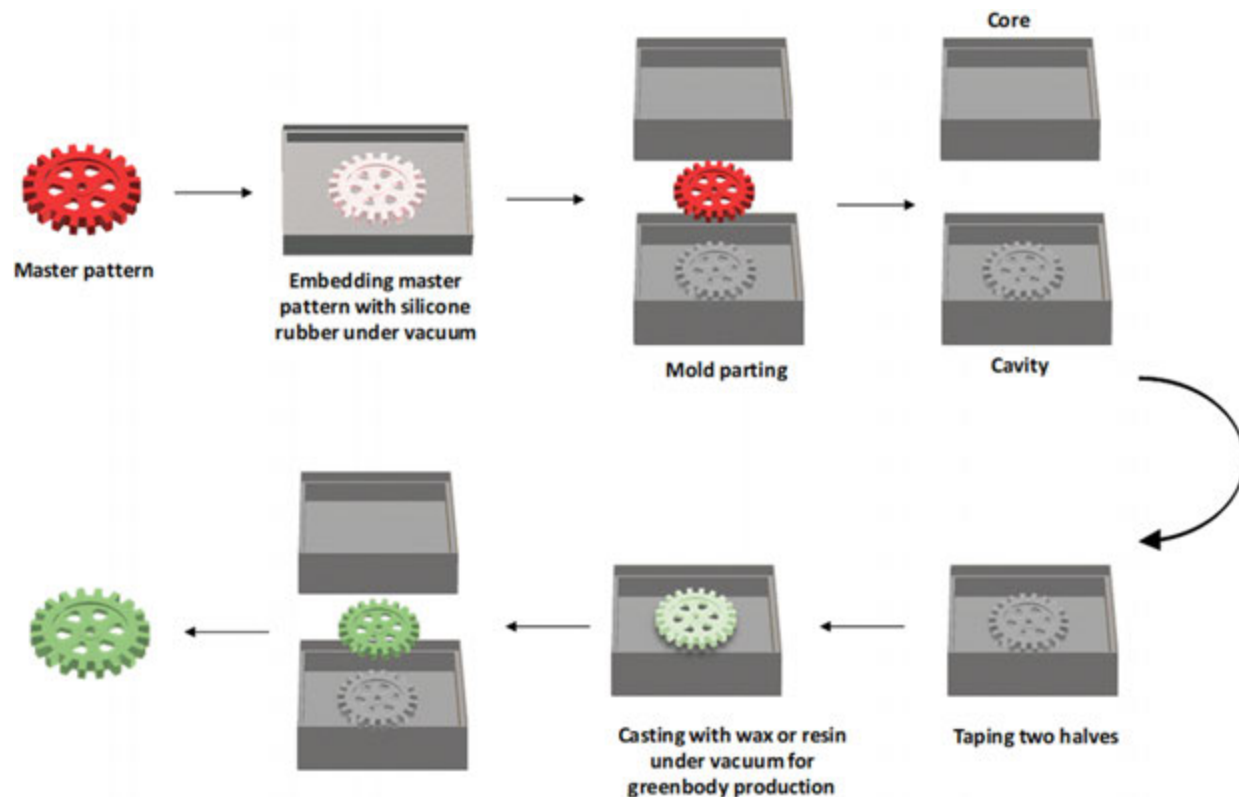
Manufacturing steps involved in vacuum casting. Reproduced according to Tang, Y., Tan, W.K., Fuh, J.Y.H., *et al.*, 2007. Micro-mold fabrication for a micro-gear via vacuum casting. *Journal of Materials Processing Technology* 192–193, 334–339.
